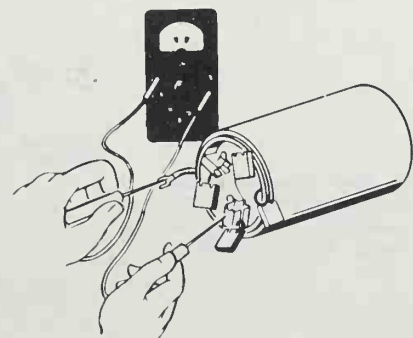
Ohmmeter used to check for breaks or opens in field coil windings. Be sure to check lead wires.
